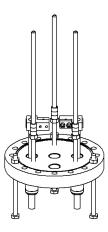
Base Flange with All-Thread Rods, Nuts, and Insulators
